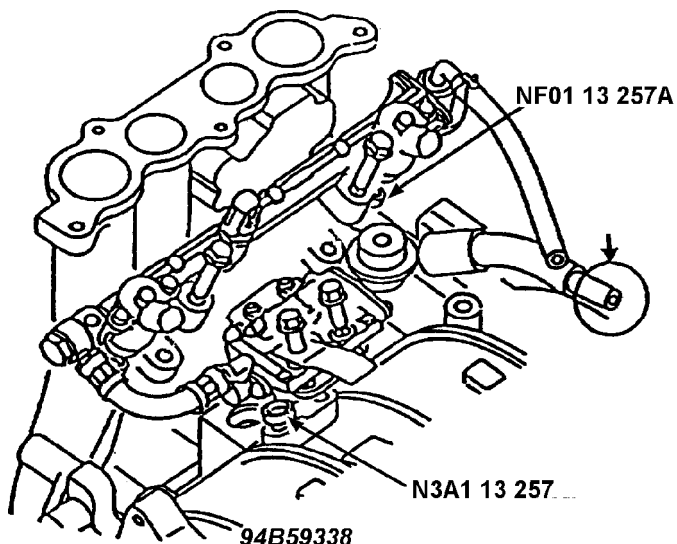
Installing Primary & Secondary Fuel Distributors to Engine
